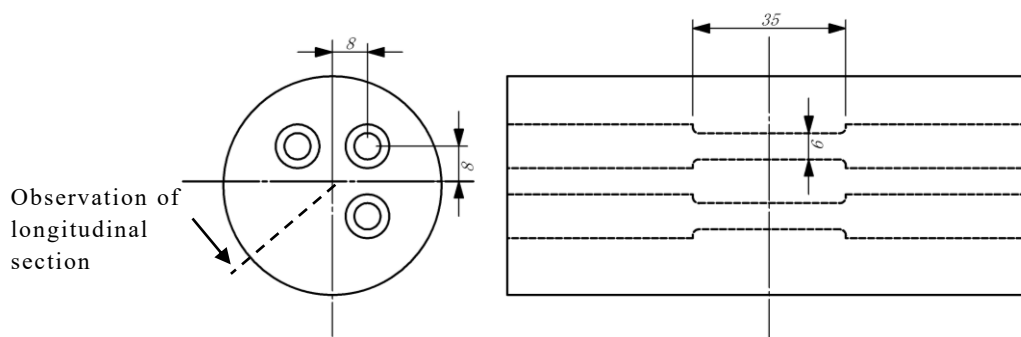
Locations of gas pressure weld specimens for tensile tests and observation of longitudinal section
